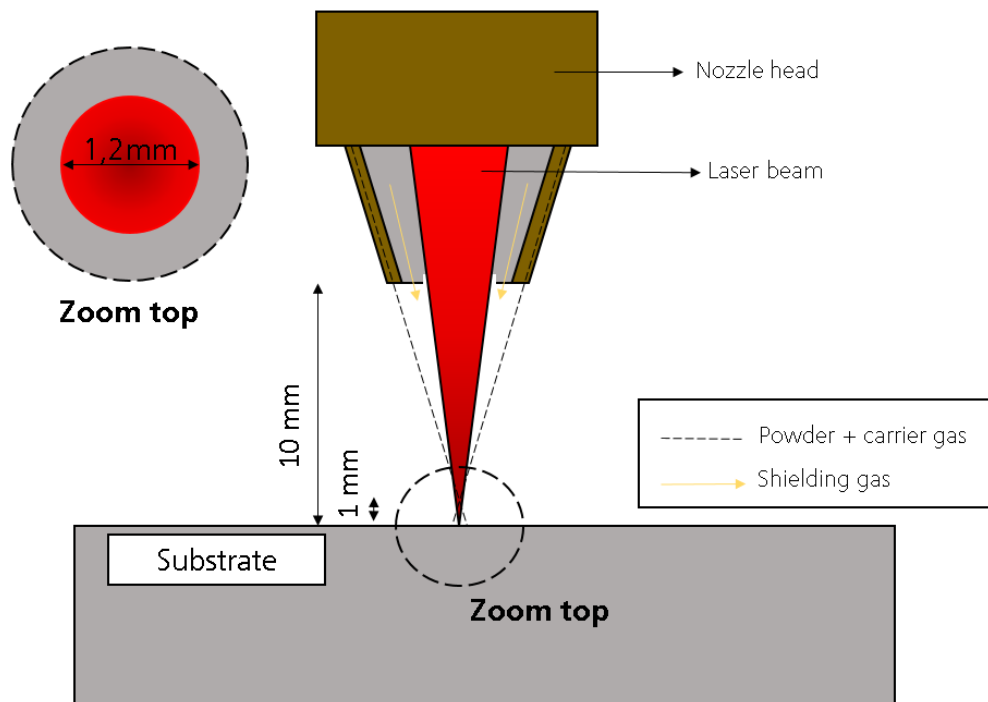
CAD drawing and manufacturers EHLA system from HORNET [2].
